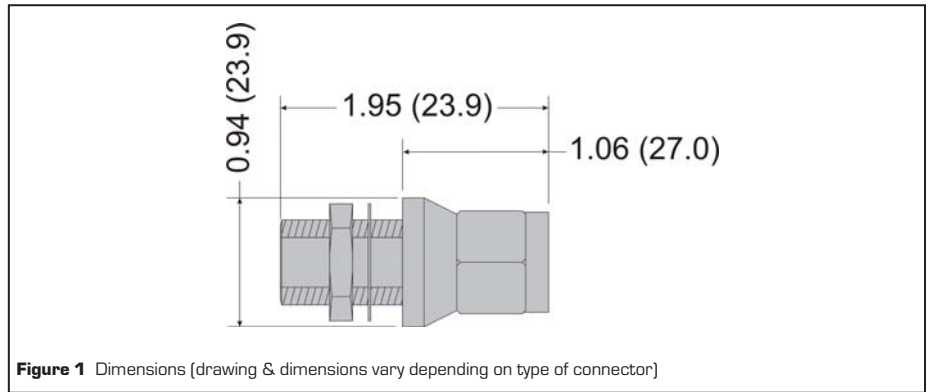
Dimensions (drawing & dimensions vary depending on type of connector)
